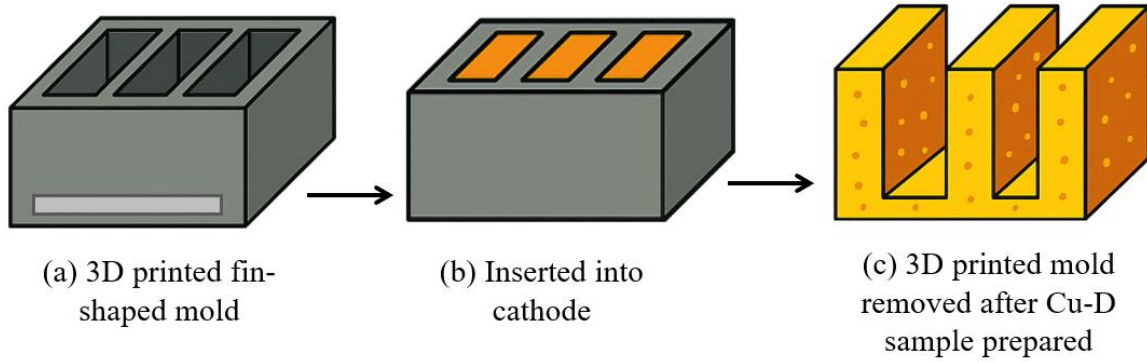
Schematic illustration of the proposed mold-assisted electrodeposition route for fabricating fin-shaped Cu-D composites: (a) 3D-printed fin-shaped mold, (b) mold inserted into the cathode for electrodeposition, and (c) removal of the mold after deposition to reveal the final Cu-D fin structure.
